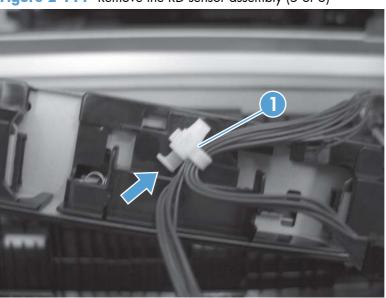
Remove the RD sensor assembly (5 of 6)
